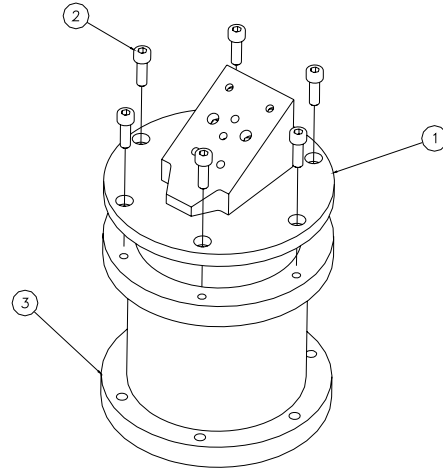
AGMD-279-US60 Single Head Adapter Parts Identification (Top View)
